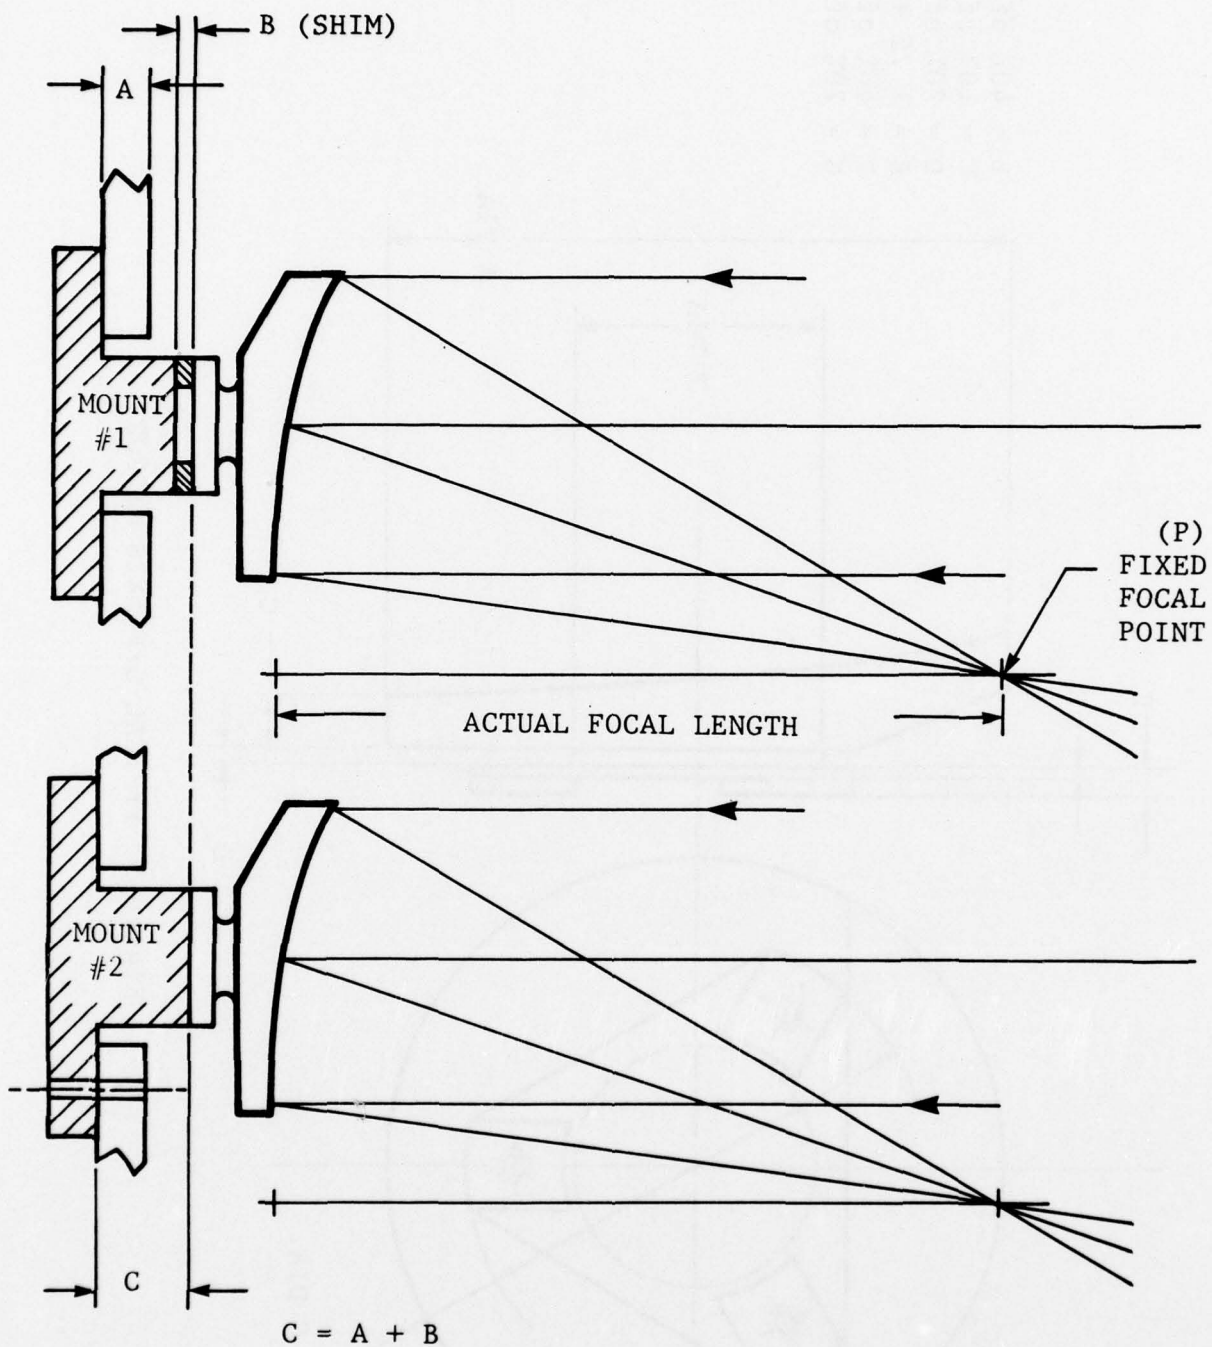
USU MIRROR MOUNT/ALIGNMENT TECHNIQUE
